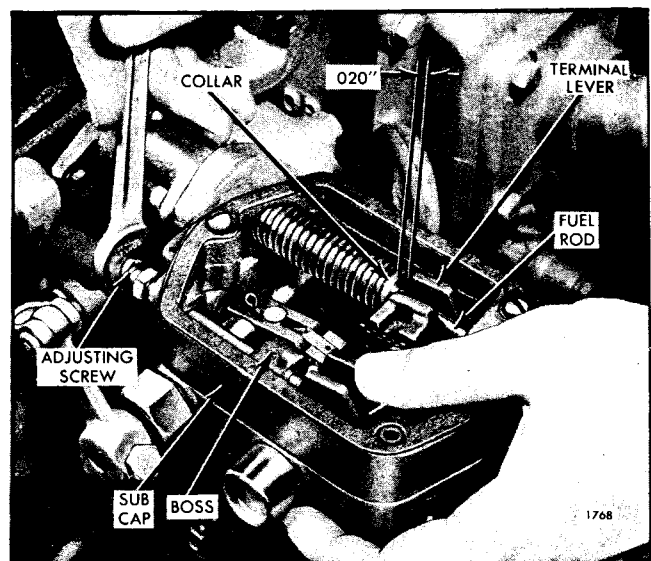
Setting Maximum Fuel Adjusting Screw (Load Limit)
